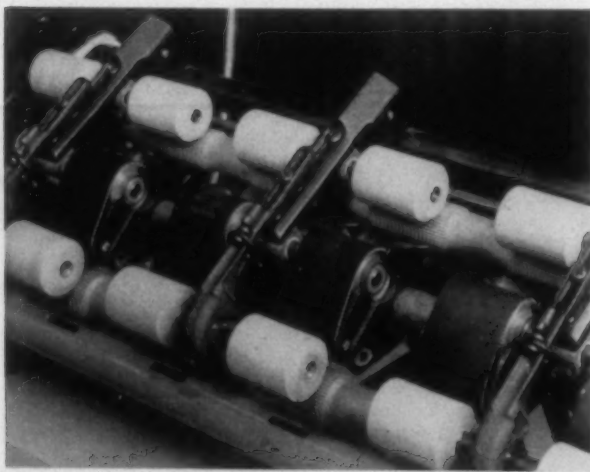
Dixon's double apron Casablanca Super Saddle Guide changeover.
